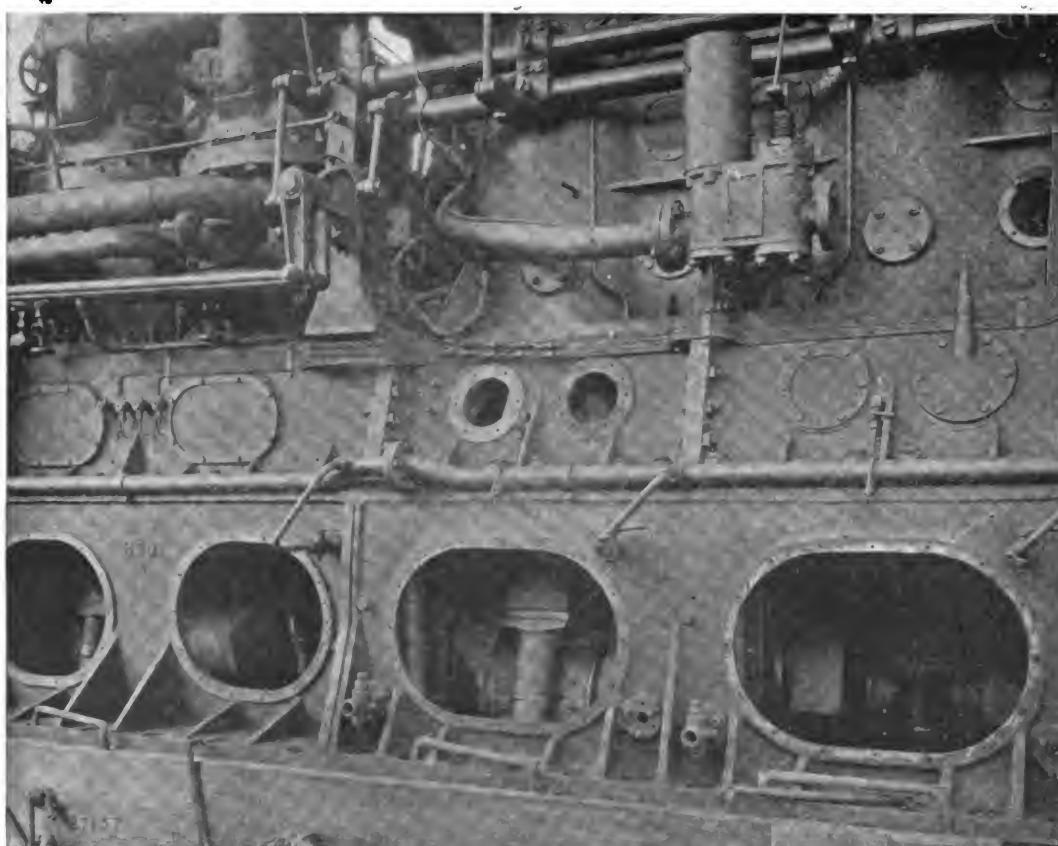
Closer view of maneuvering gear, air compressors (at upper left), connecting rod caps and crankshaft of the Augsburg engine. Note how the rod weight is kept remarkably low by eliminating excess metal
